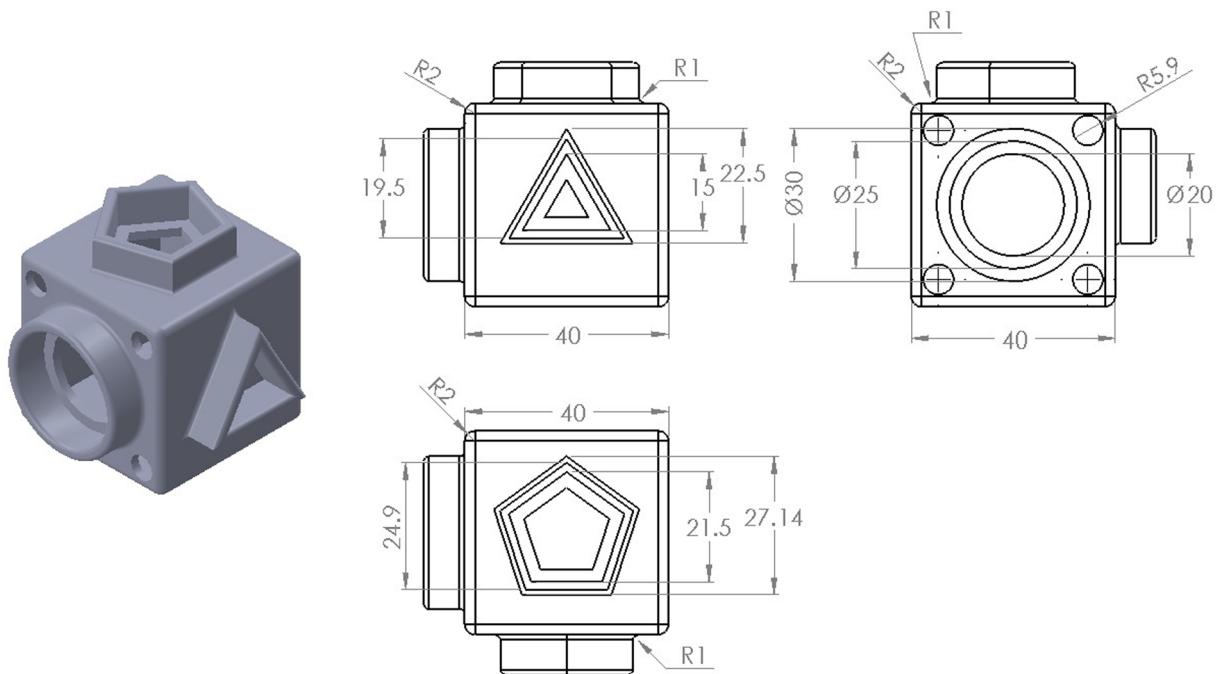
Technical drawing and 3D model of the designed biomedical implant sample
